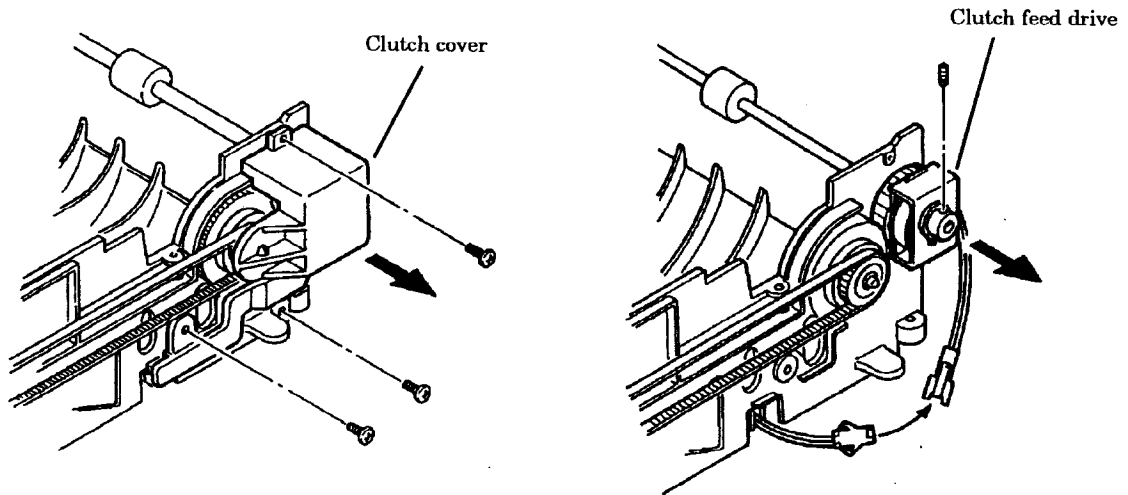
REMOVING THE CLUTCH FEED DRIVE
